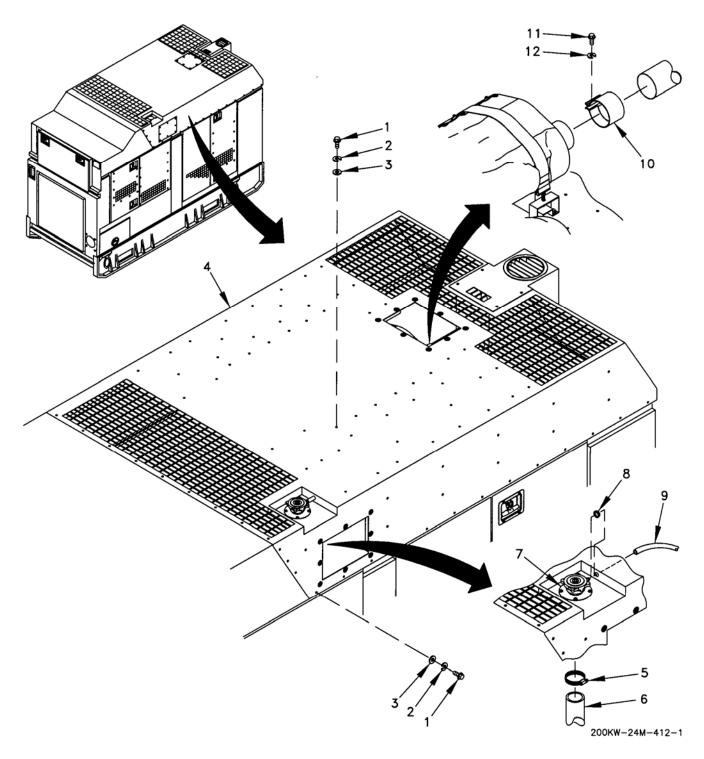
Front Roof Section Housing Assembly (Sheet 1 of 2).
